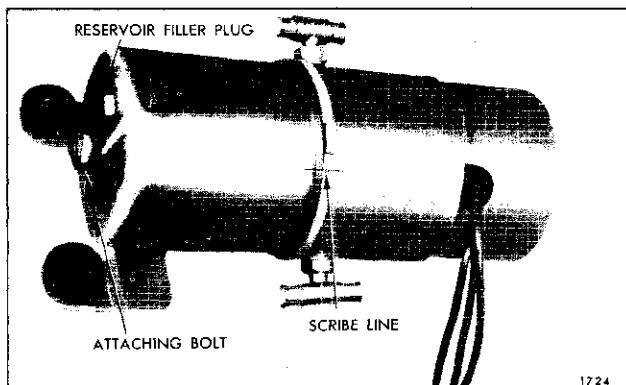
Hydro-Lectric Motor And Pump Assembly
